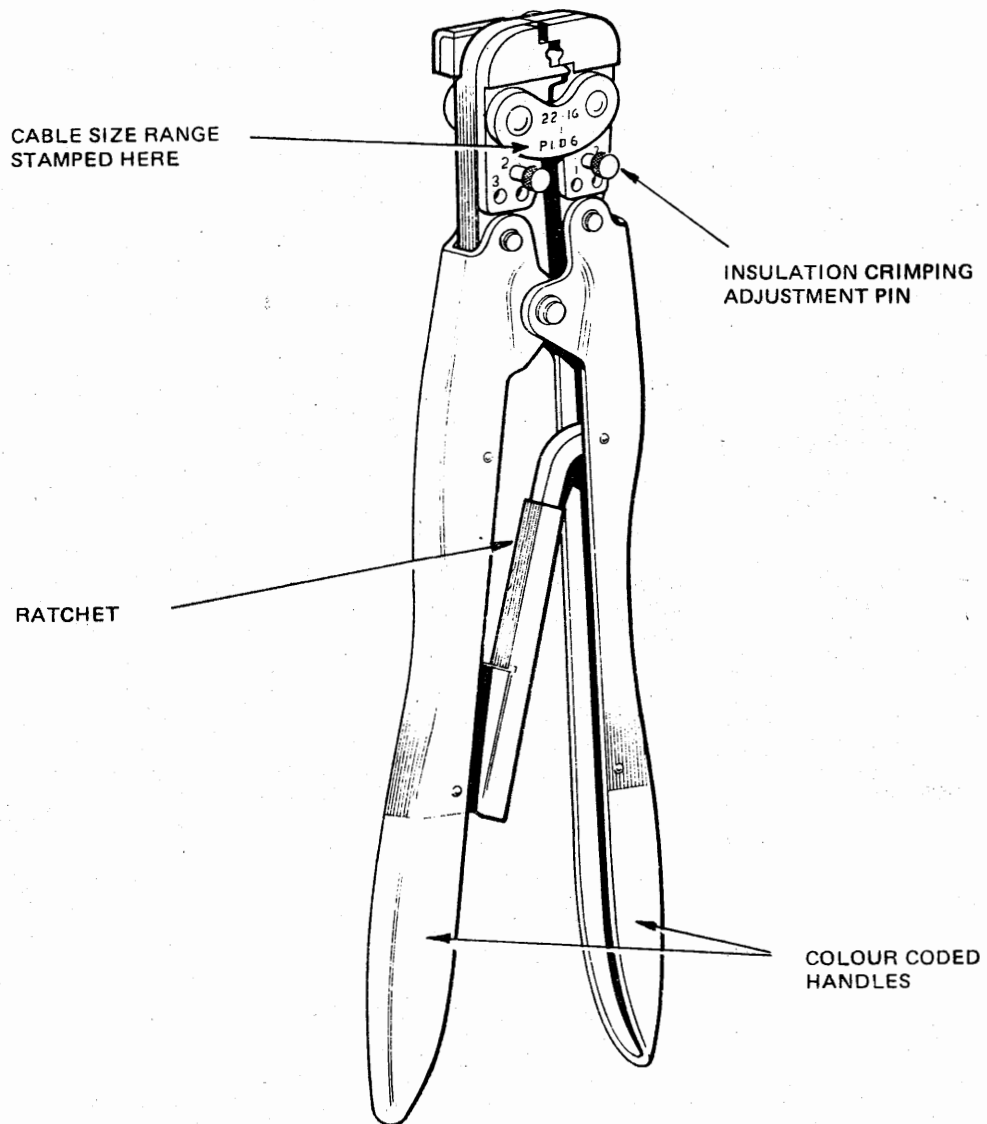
EXAMPLE OF A HAND OPERATED CRIMP TOOL
